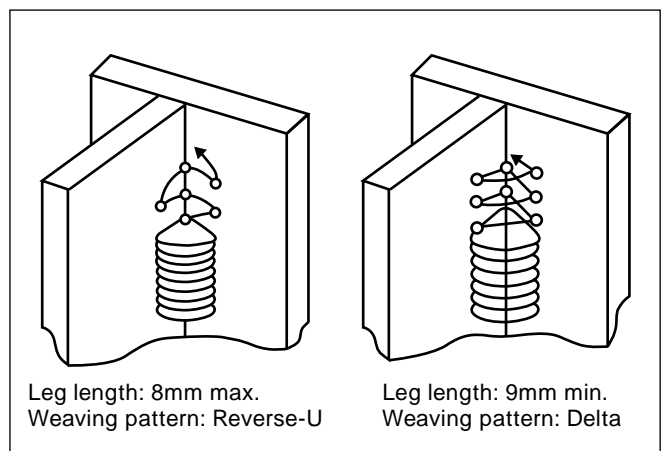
Typical weaving patterns suitable for vertical-up fillet welding
